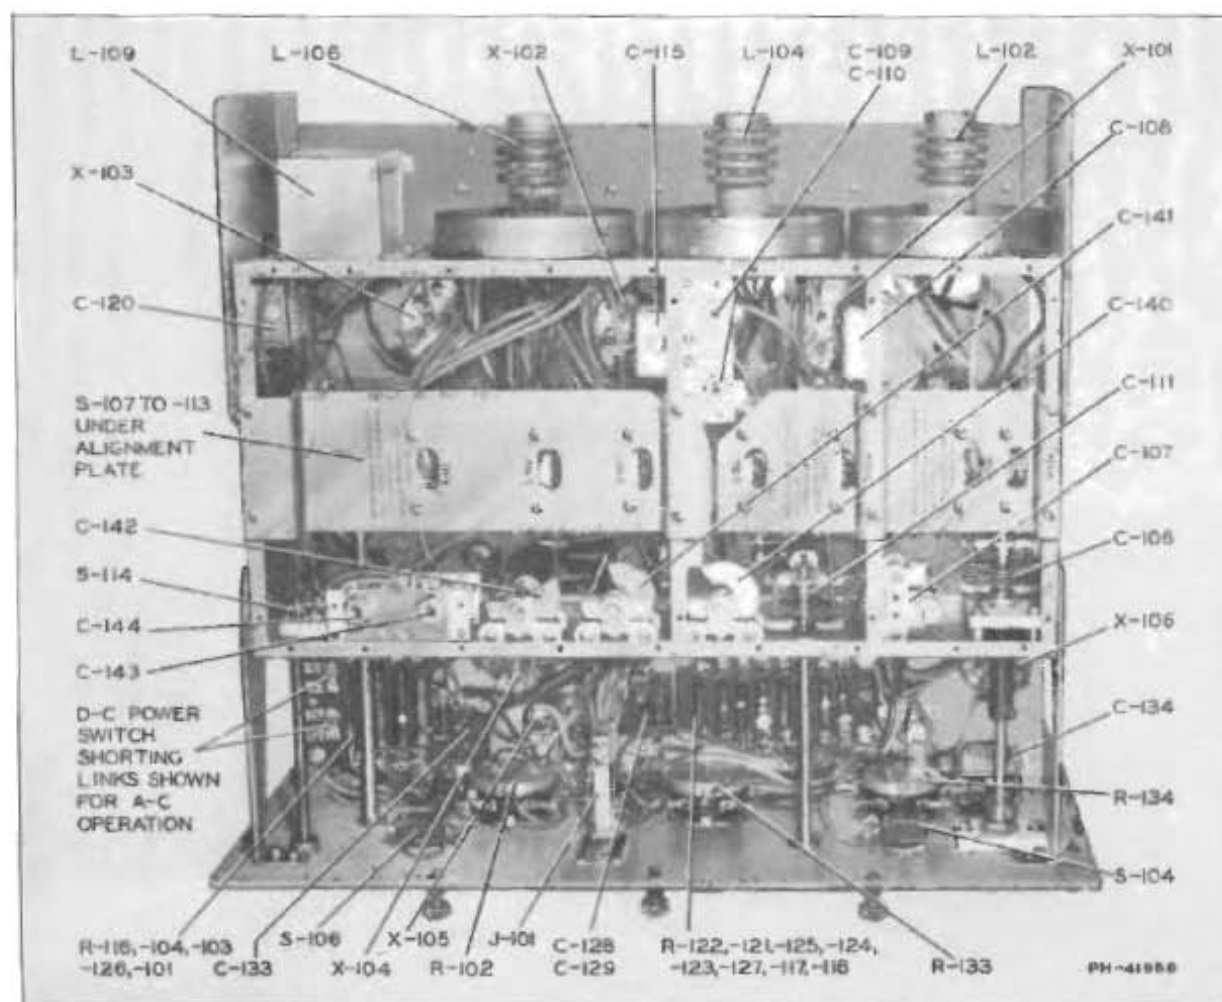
Receiver Unit CRV-40044 (Bottom View of Chassis—Covers Removed)
